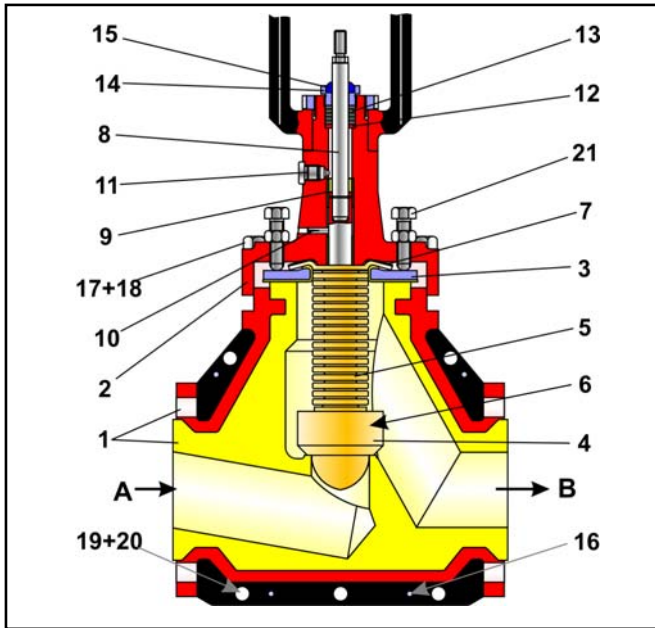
Sectional diagram of Series 1z Globe Valve
